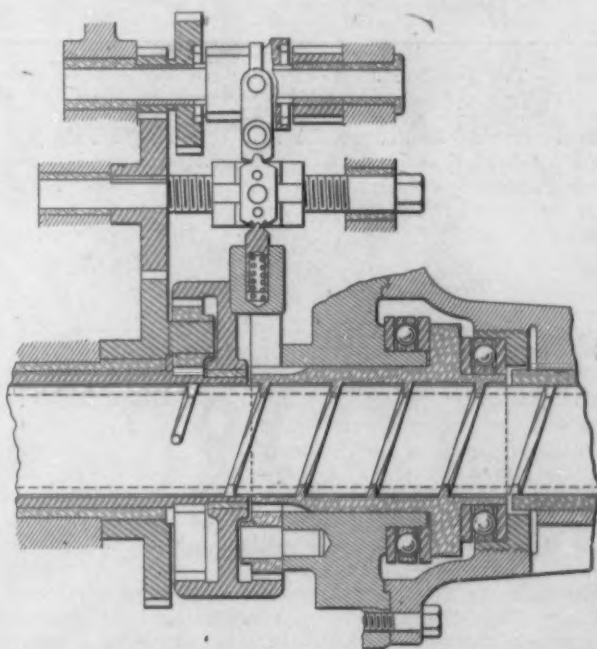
An Enlarged Sectional View of the Spindle Limit Stops
